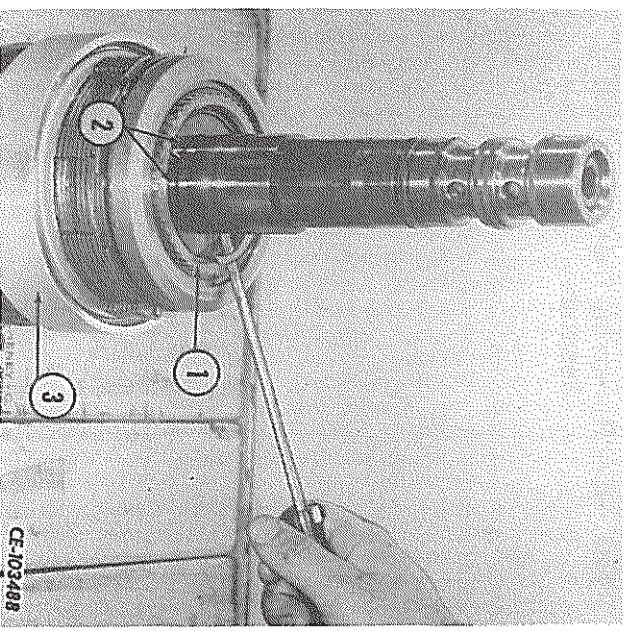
Removing the Clutch Hub Retainer Snap Ring
